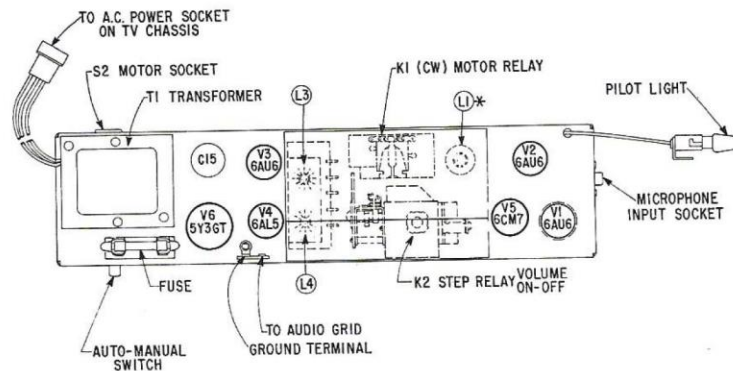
Tube and Trimmer Layout 18E20, 18E20Q, 18D20 and 18D20Q Chassis
